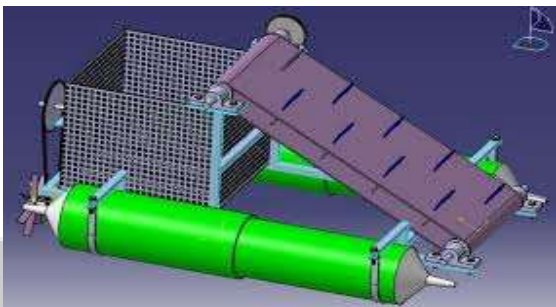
Proposed of Fabrication Garbage Removal Machine
